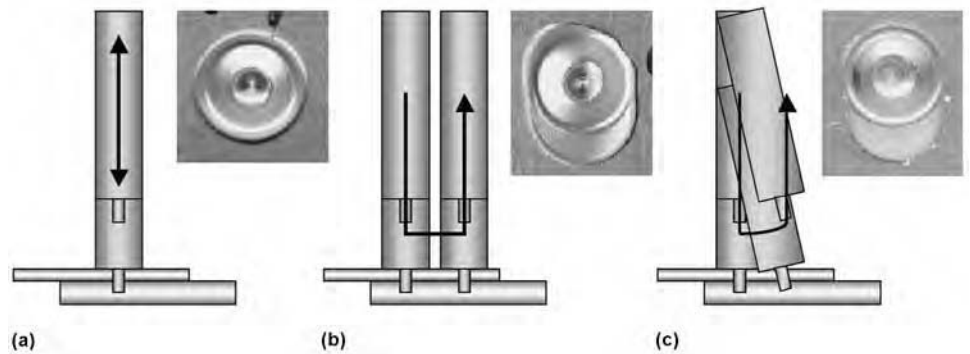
Tool movement and view of finished spot for three variants of friction stir welding (FSW) spot welds. (a) Friction stir spot welding (sometimes called poke welding). (b) Stitch FSW. (c) Swing FSW. Source: Ref 110
